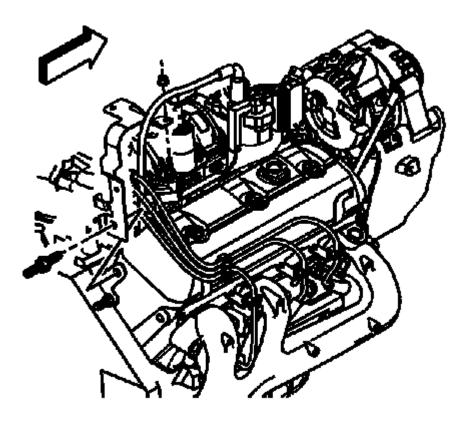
View Of Engine Wiring Harness Rear Bracket Nut Courtesy of GENERAL MOTORS CORP.
